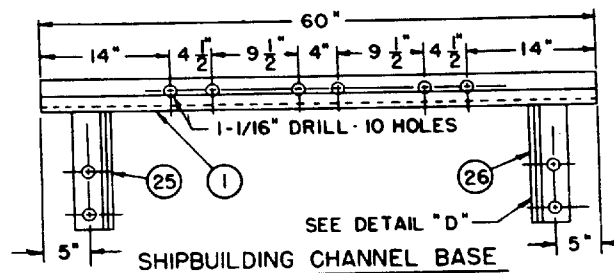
DETAIL OF BRACE FOR SHIPBUILDING CHANNEL
